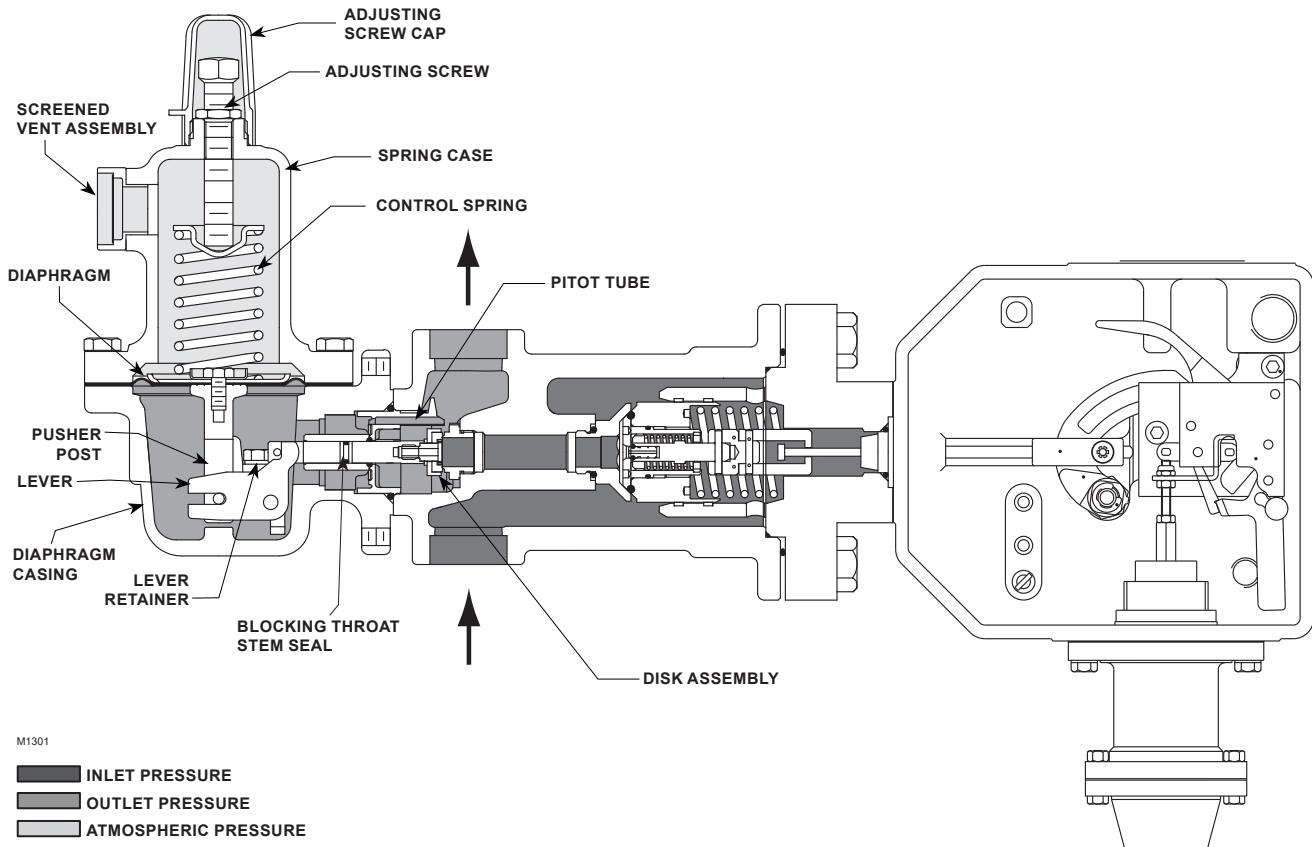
Type 627OSX with Type 627 Regulator and Type OSE Slam-Shut Valve
